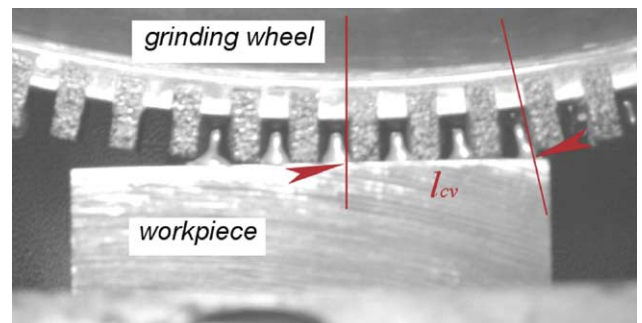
Entrainment of coolant into the grinding zone using the segmented wheel.
